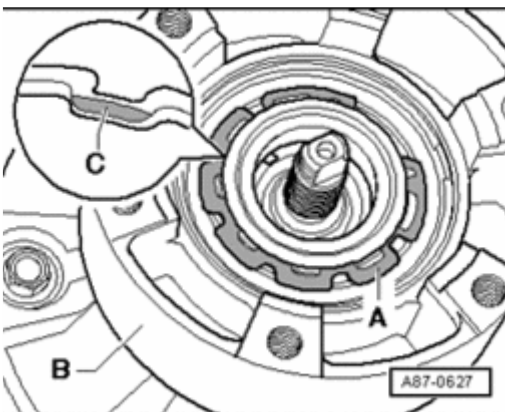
Identifying Securing Ring, Drive Plate & Bevelled Side
